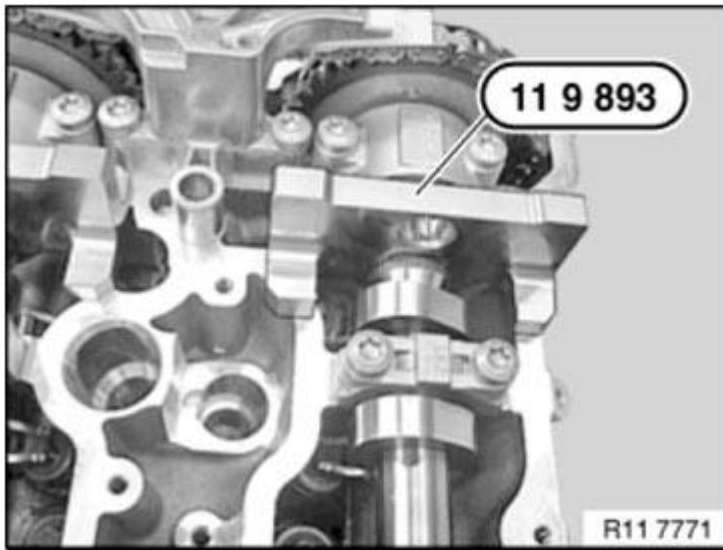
Identifying Special Tool 11 9 893 On Intake Camshaft
